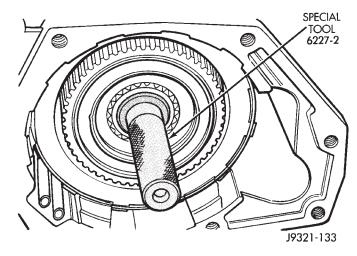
Checking Alignment Of Overdrive Planetary Gear And Overrunning Clutch Splines—46RH
